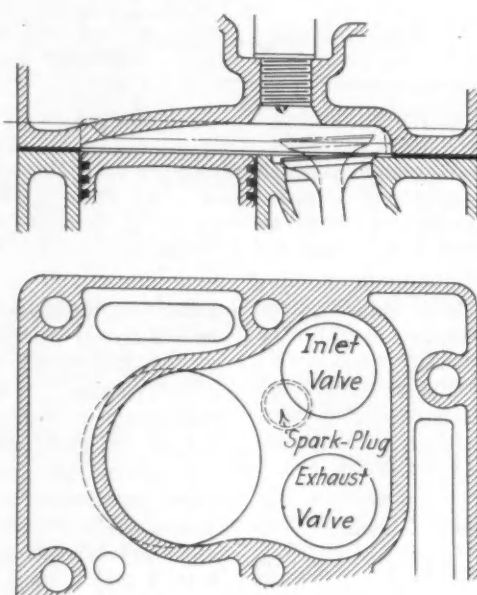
AN APPLICATION OF THE L-HEAD TO A HIGH-SPEED SIX-CYLINDER ENGINE
